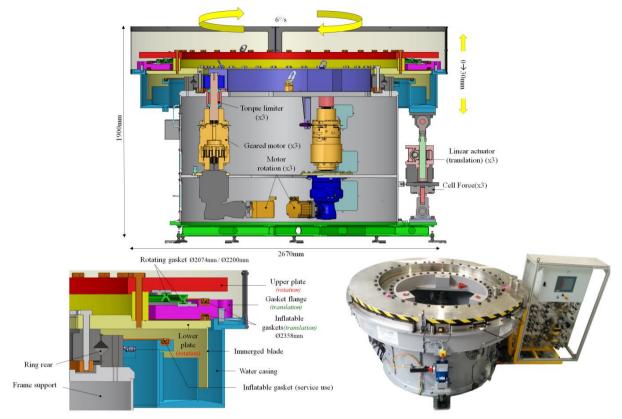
Top: RST schematic cut-view of the mechanical structure; Bottom left: detailed cut-view; Bottom right: picture of the RST
